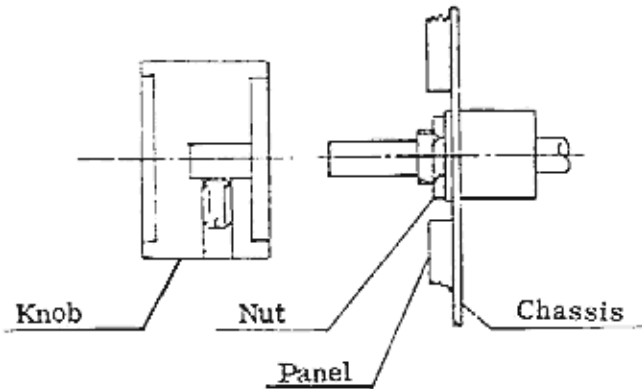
KNOB & SHAFT ASSEMBLY FOR BANDSPREAD
